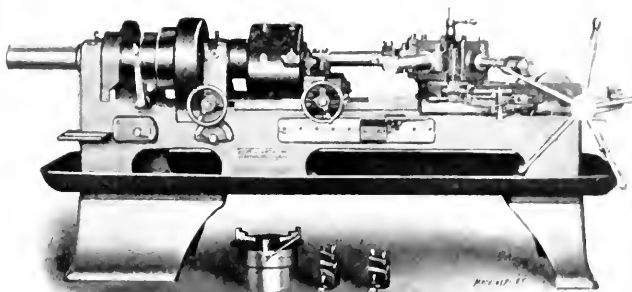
Turret Lathe Rigged for Boring Gas Engine Cylinders
